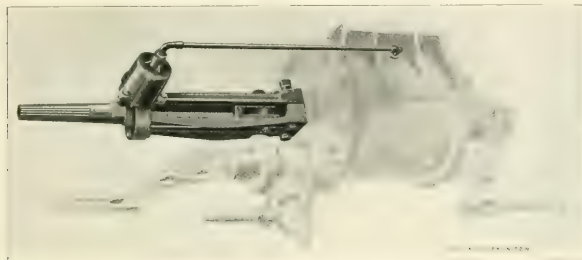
ATTACHMENT OF SLACK ADJUSTER TO BRAKE CYLINDER.
